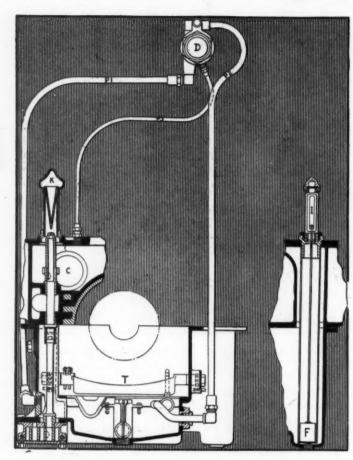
illustrating manner of tilting oil troughs. Section of oil indicator
